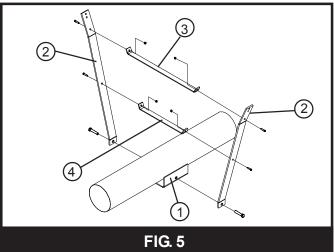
57' Manual & Hydraulic Main Truss 61' - 71' Hydraulic Upper Truss
